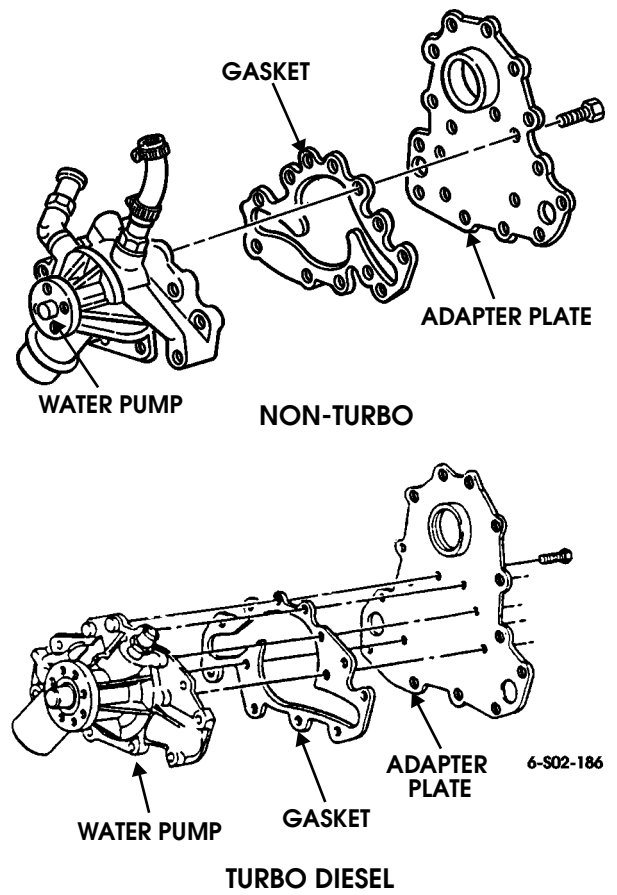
Water Pump, Adapter Plate, and Gasket Disassembly
